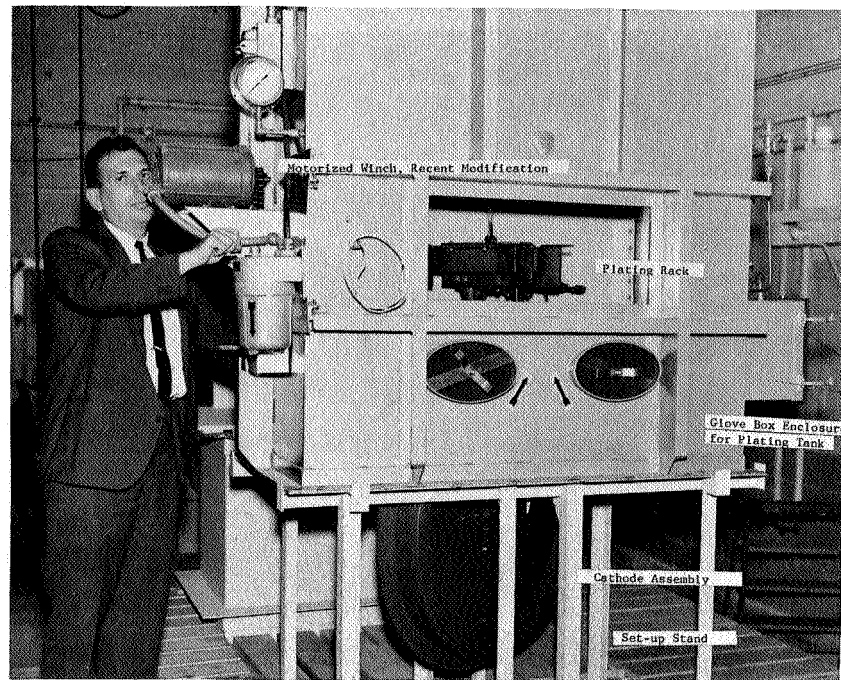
Hoisting the plating rack into the glove box enclosure using the motorized drive.
